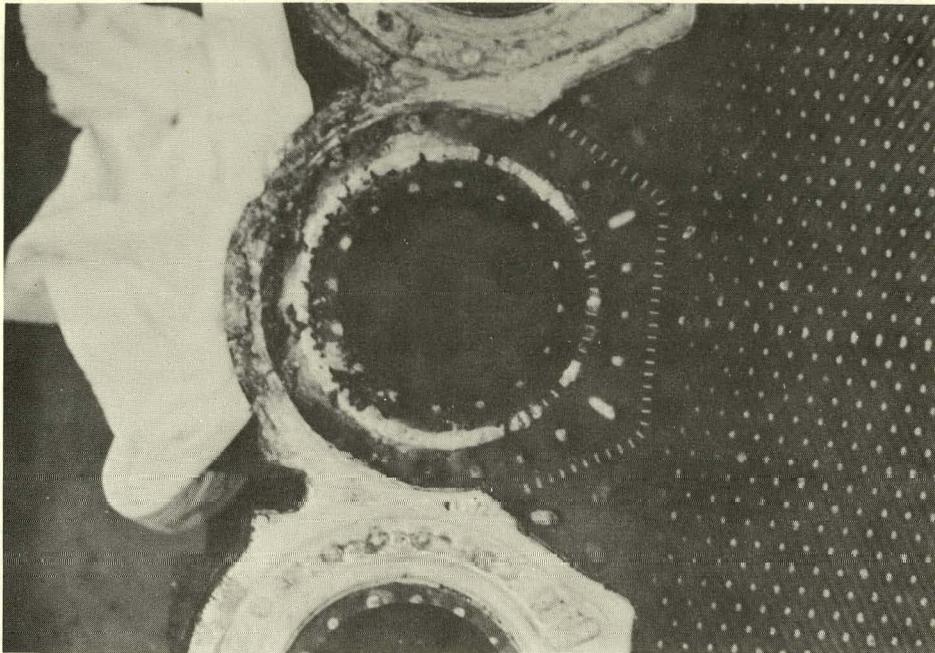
Close-up View of Inlet End of Raw Seawater Side of Plate Showing Build-up of Salts. Cleaning revealed minimal attack to underlying aluminum.
